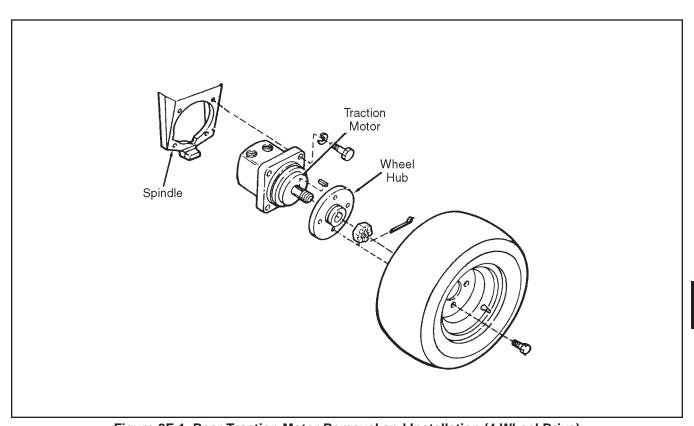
F-1. Rear Traction Motor Removal and Installation (4 Wheel Drive)
